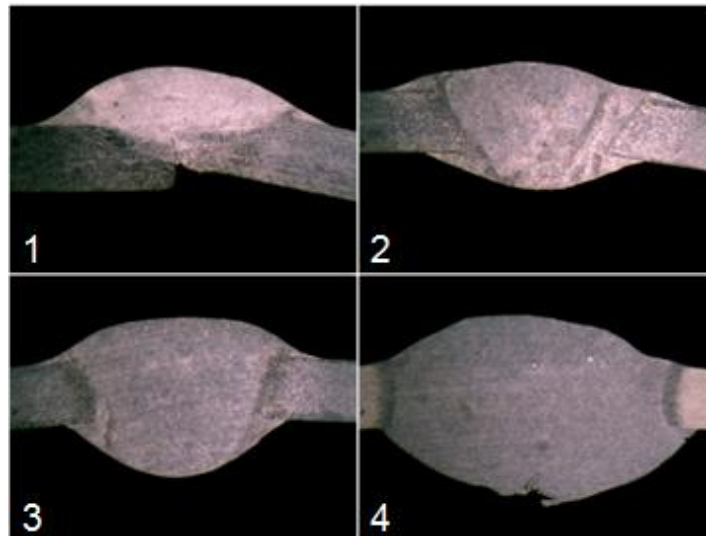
Cross section of welding samples with respective numbering by using filler ER5356
